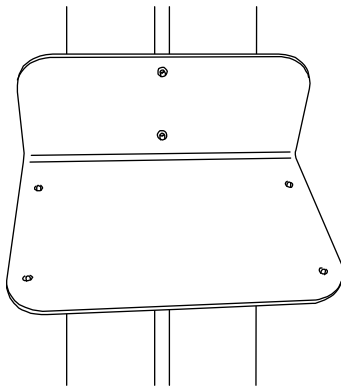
Install mounting shelf on column (printer mounting shelf shown).
